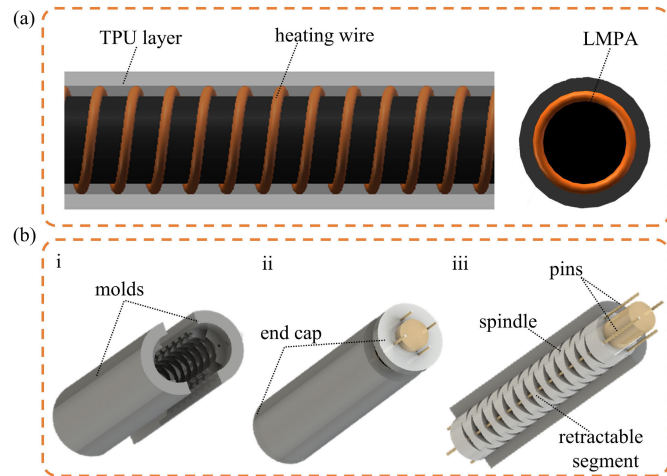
The design and fabrication of stiffness regulating tube. (a) The CAD model of the stiffness regulating tube. (b) The detailed fabrication process for the variable-length catheter.
